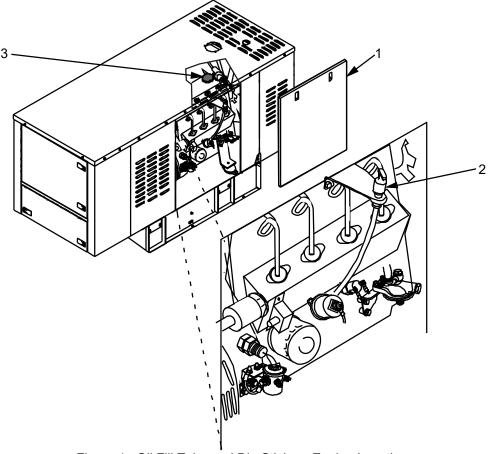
Oil Fill Tube and Dip Stick on Engine Location.
